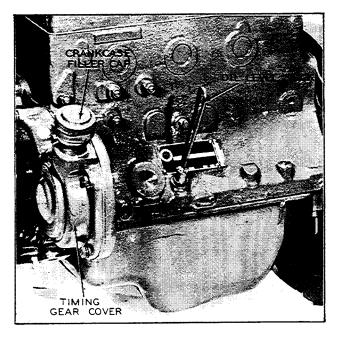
Crankcase...location of Fill Cap and Oil Level Dipstick.
